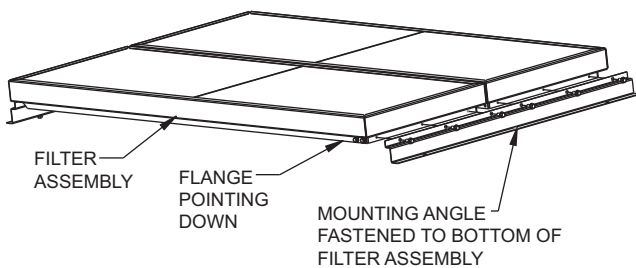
Correctly Assembled Bottom Filter Assembly (Sizes 40-60 Only)
